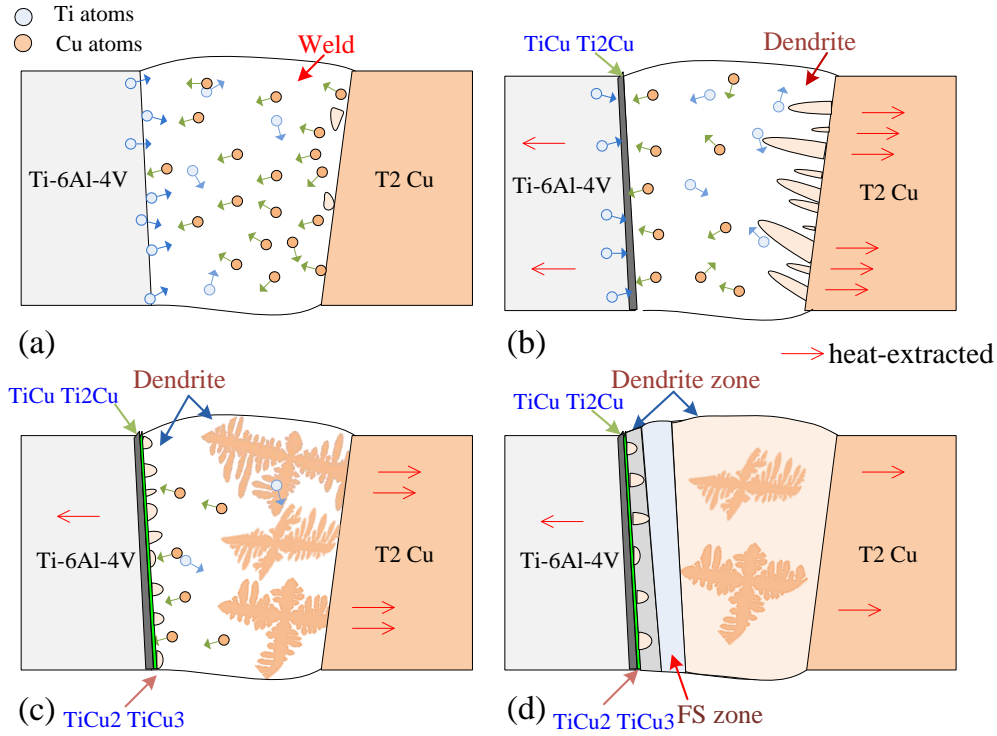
Schematic presentations of welding reaction of welding-brazing
